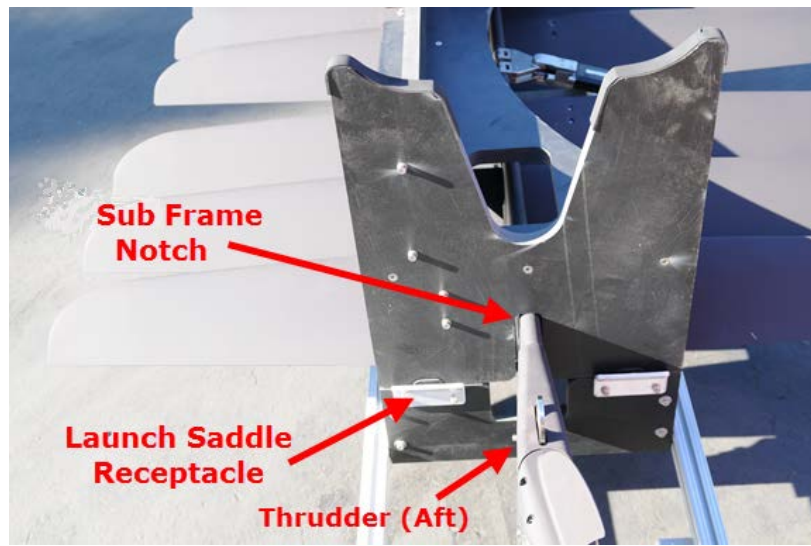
Launch Saddle Mounted on Launch Stand - Aft View
